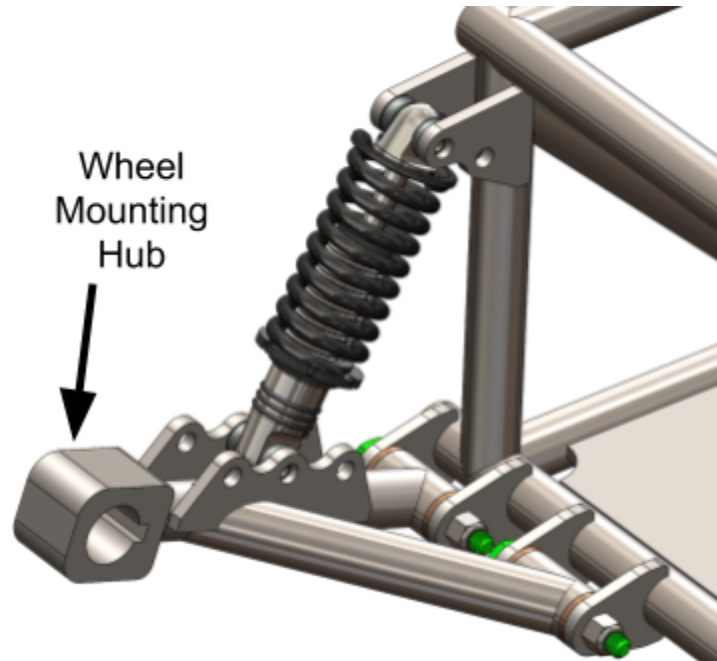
The suspension consists of a bike spring and damper, an A frame, and a wheel mounting bracket. The connection for the bike spring and damper is variable to allow for change in spring force as necessary once the device is constructed.
